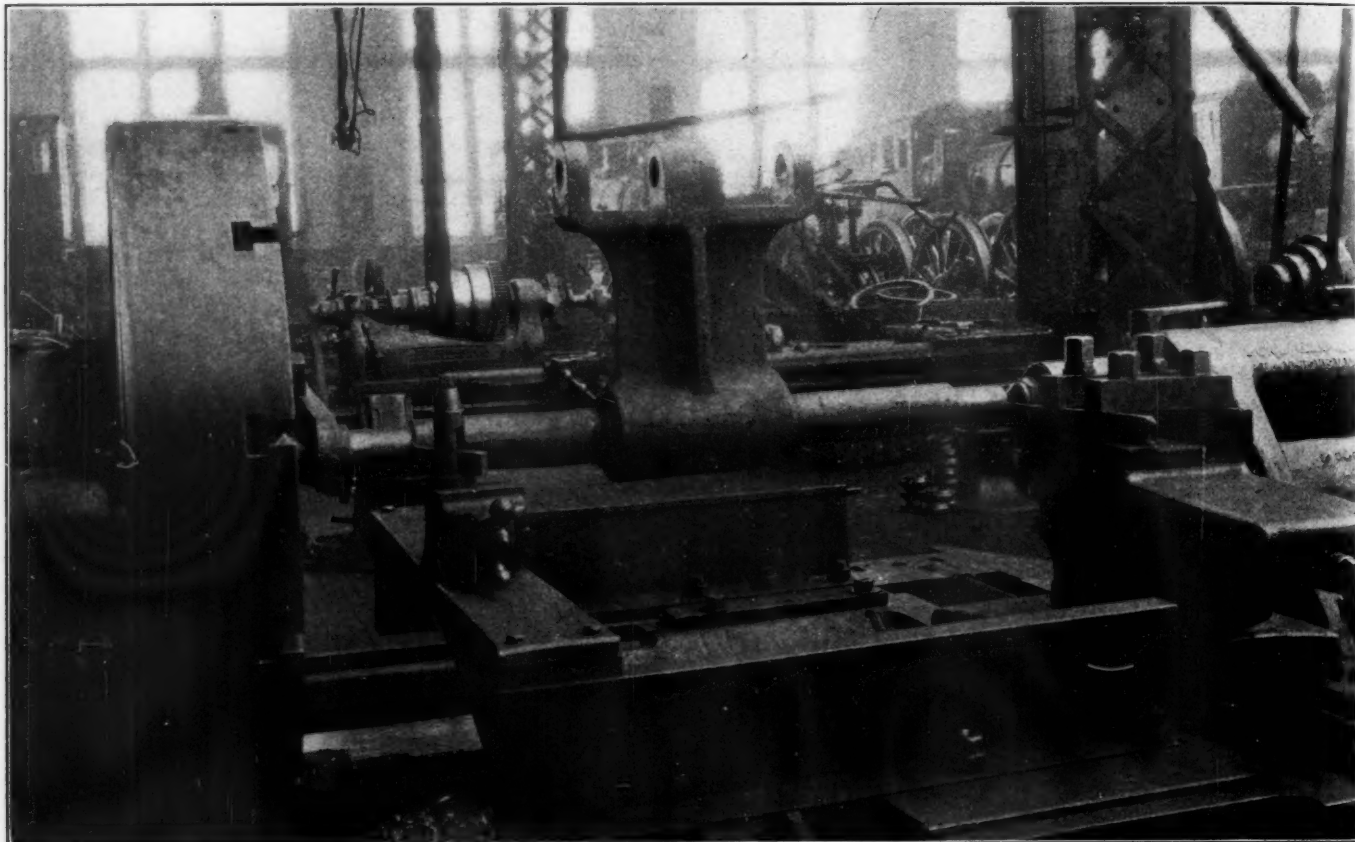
Pond Lathe Fitted for Truing Bearings on Reverse Shaft.
